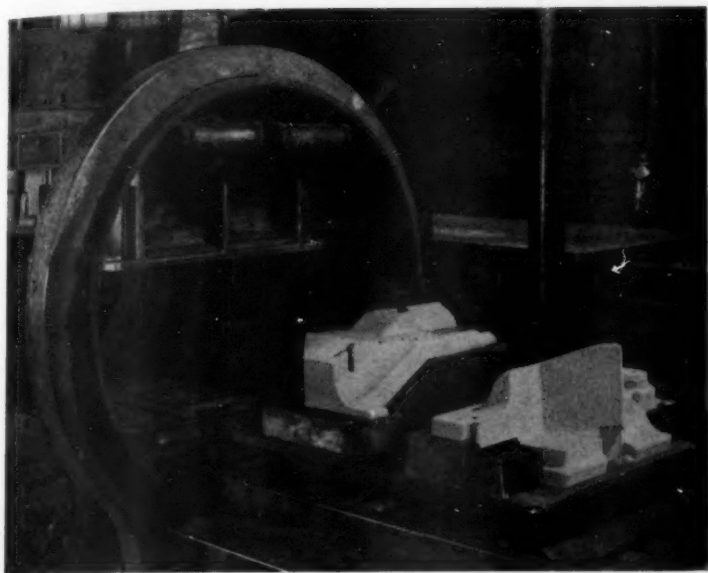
ROLL-OVER EQUIPMENT SHOWING TWO COMPLETED CORES.
